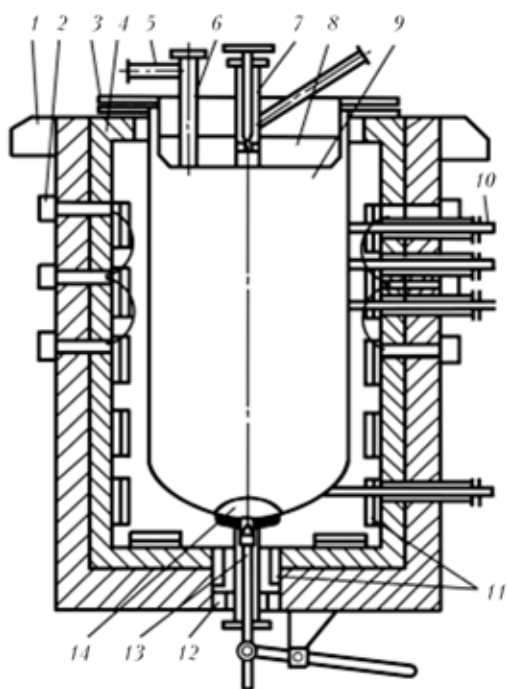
Reduction equipment with lower discharge, placed in a furnace [10]: 1) the furnace support; 2) collectors for supplying and removing air; 3) water-cooled flanged joint; 4) false bottom; 5) vacuum treatment nozzle and the nozzle for supplying argon; 6) section 4 point magnesium; 7) the section for feeding titanium tetrachloride; 8) the cover of the reactor; 9) the reactor; 10) contact monitors (thermal sensors); 11) heaters; 12) sand gate; 13) the bar of the discharge device; 14) sand gate.
